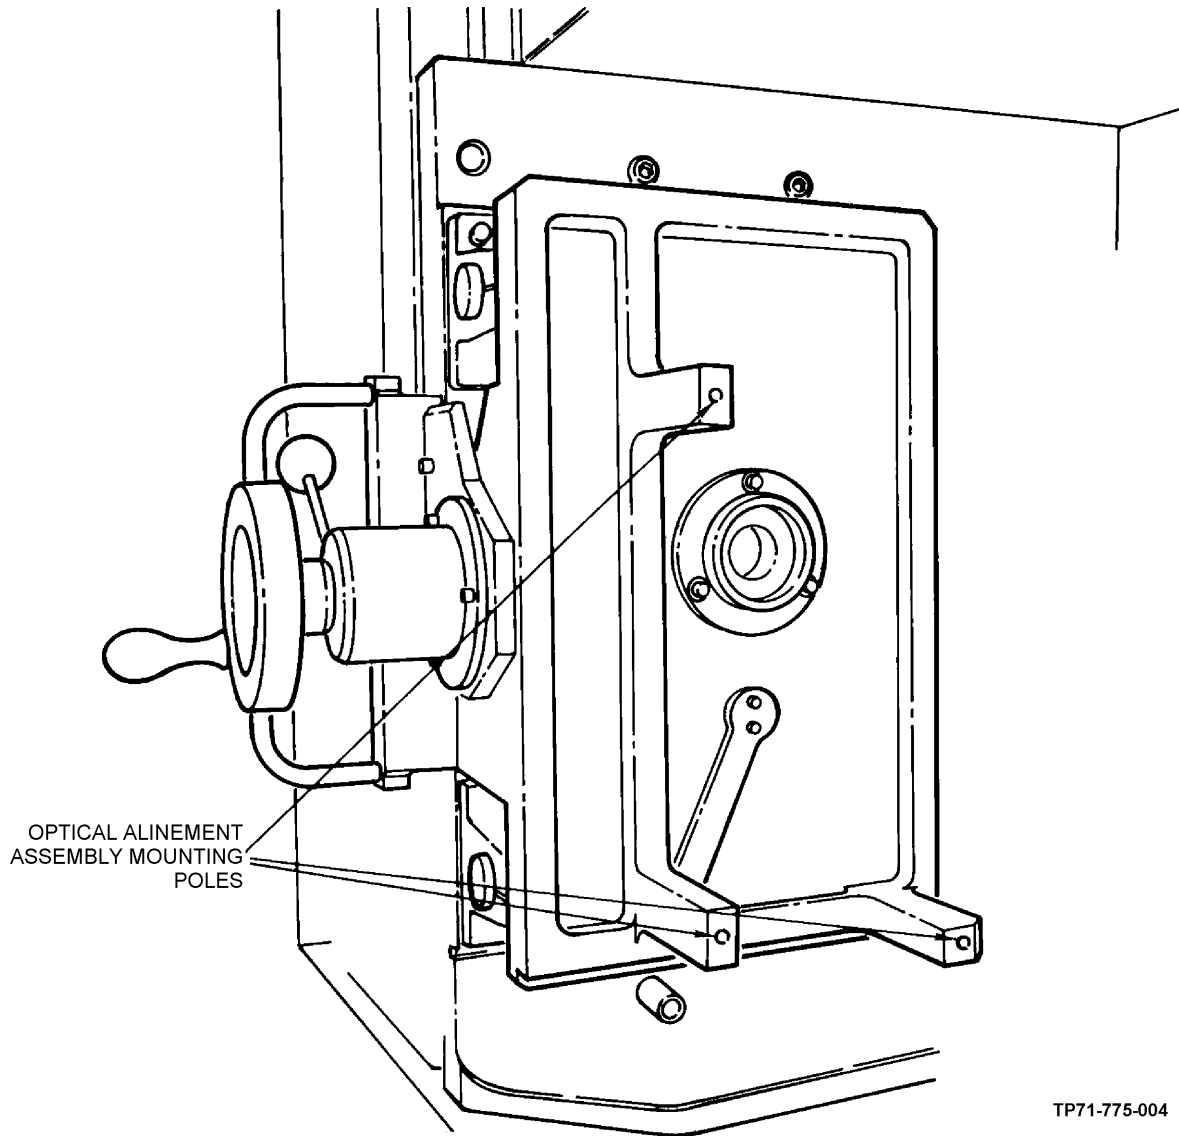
Dayside Sensor Mount Assembly Support Hole Locations
